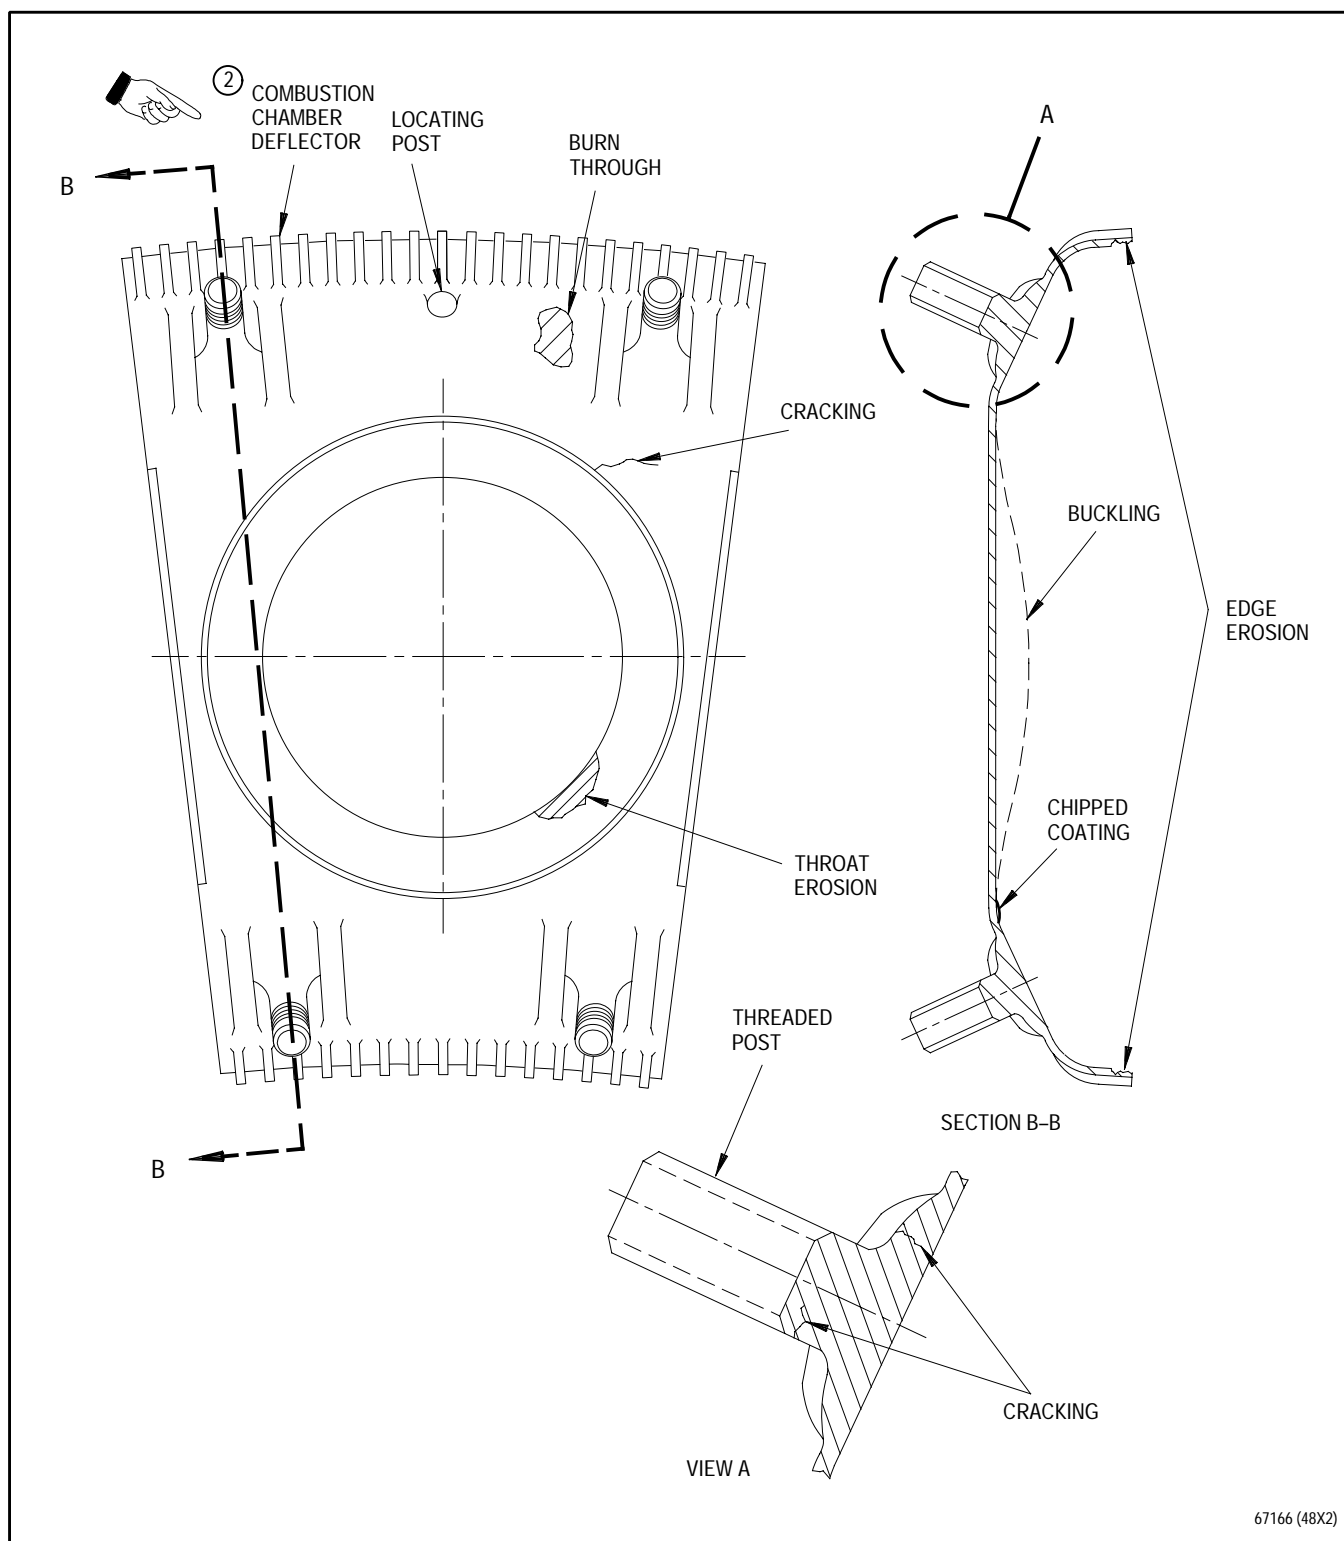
Combustion Chamber Assembly - Inspection (Sheet 2 of 7)
